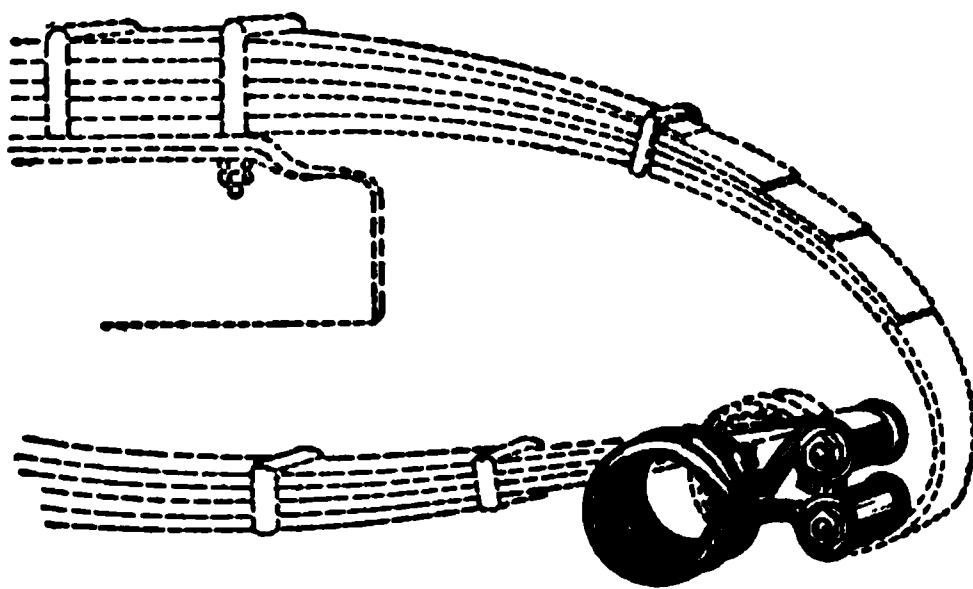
Acme Torsion Spring Fitted to Three-Quarter Elliptic Gears
